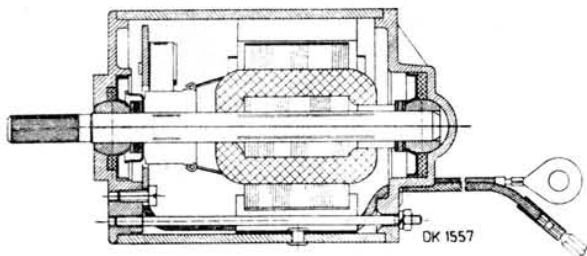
/1 - Sectional View of Radiator Fan Motor
